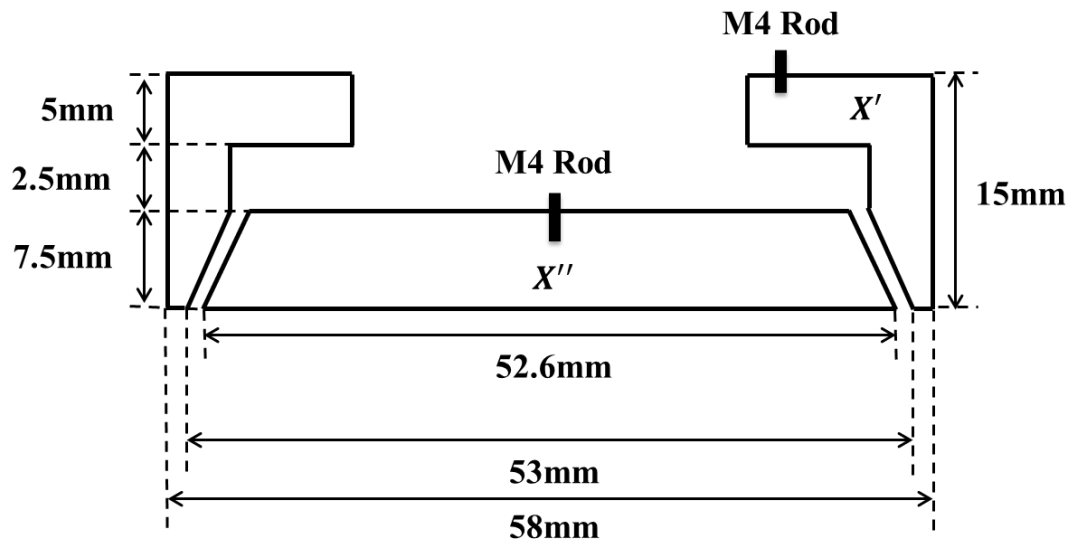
Dimensions of the modified electrodes X' and X'' of the upper half of the concentric cylindrical measurement geometry.
